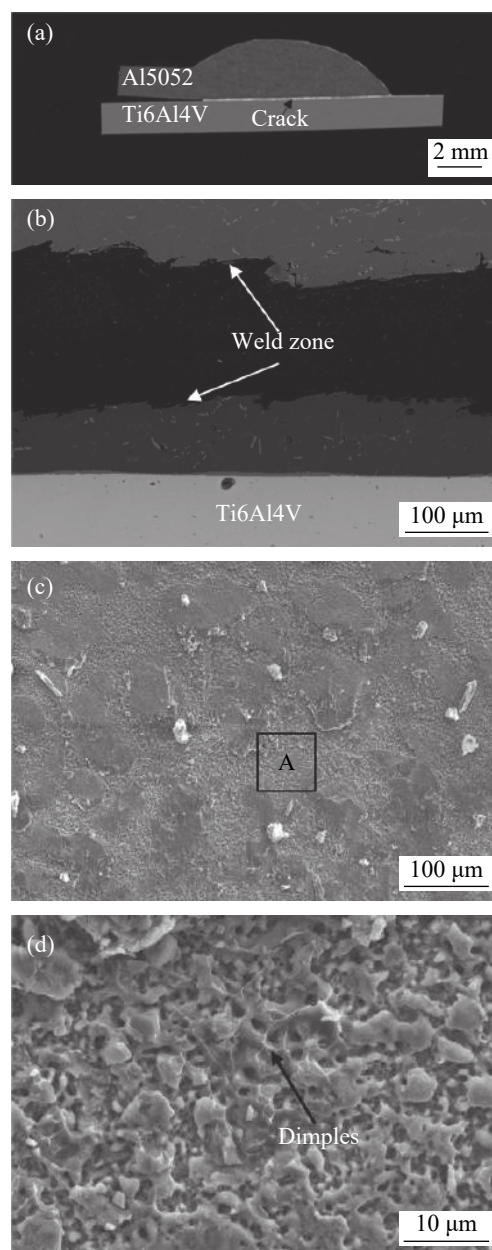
Fracture location (a) Fracture path (b) Fracture surfaces at titanium alloy side of the joint (c) (d) at 70 A welding current
